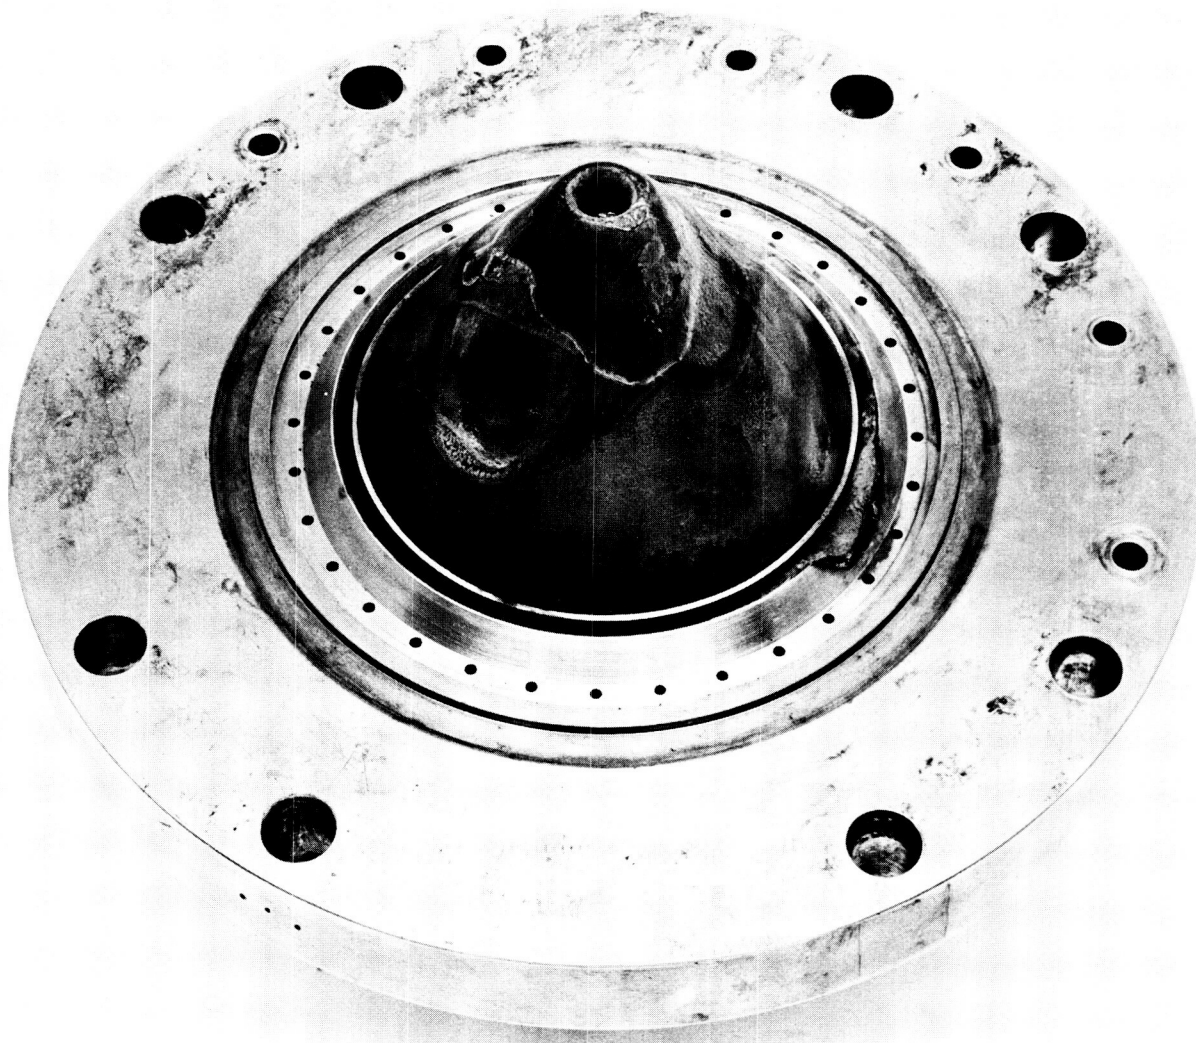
Erosion of annular impinging sheet-spray injector after several tests
